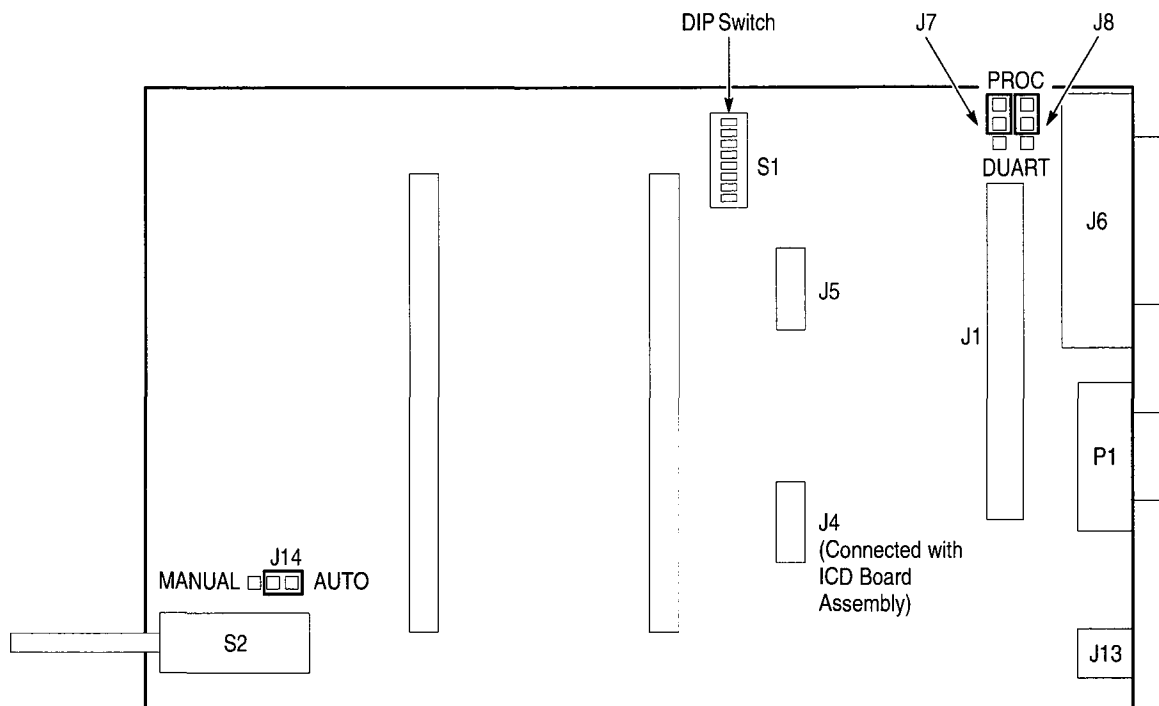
Locations of Jumpers and DIP Switches with ICD Board
